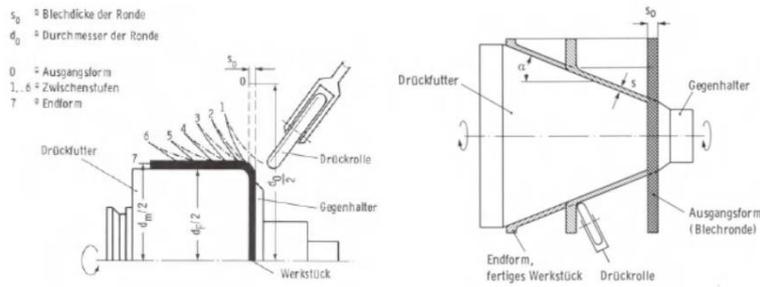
Compressive techniques(König & Klocke, 1990)
